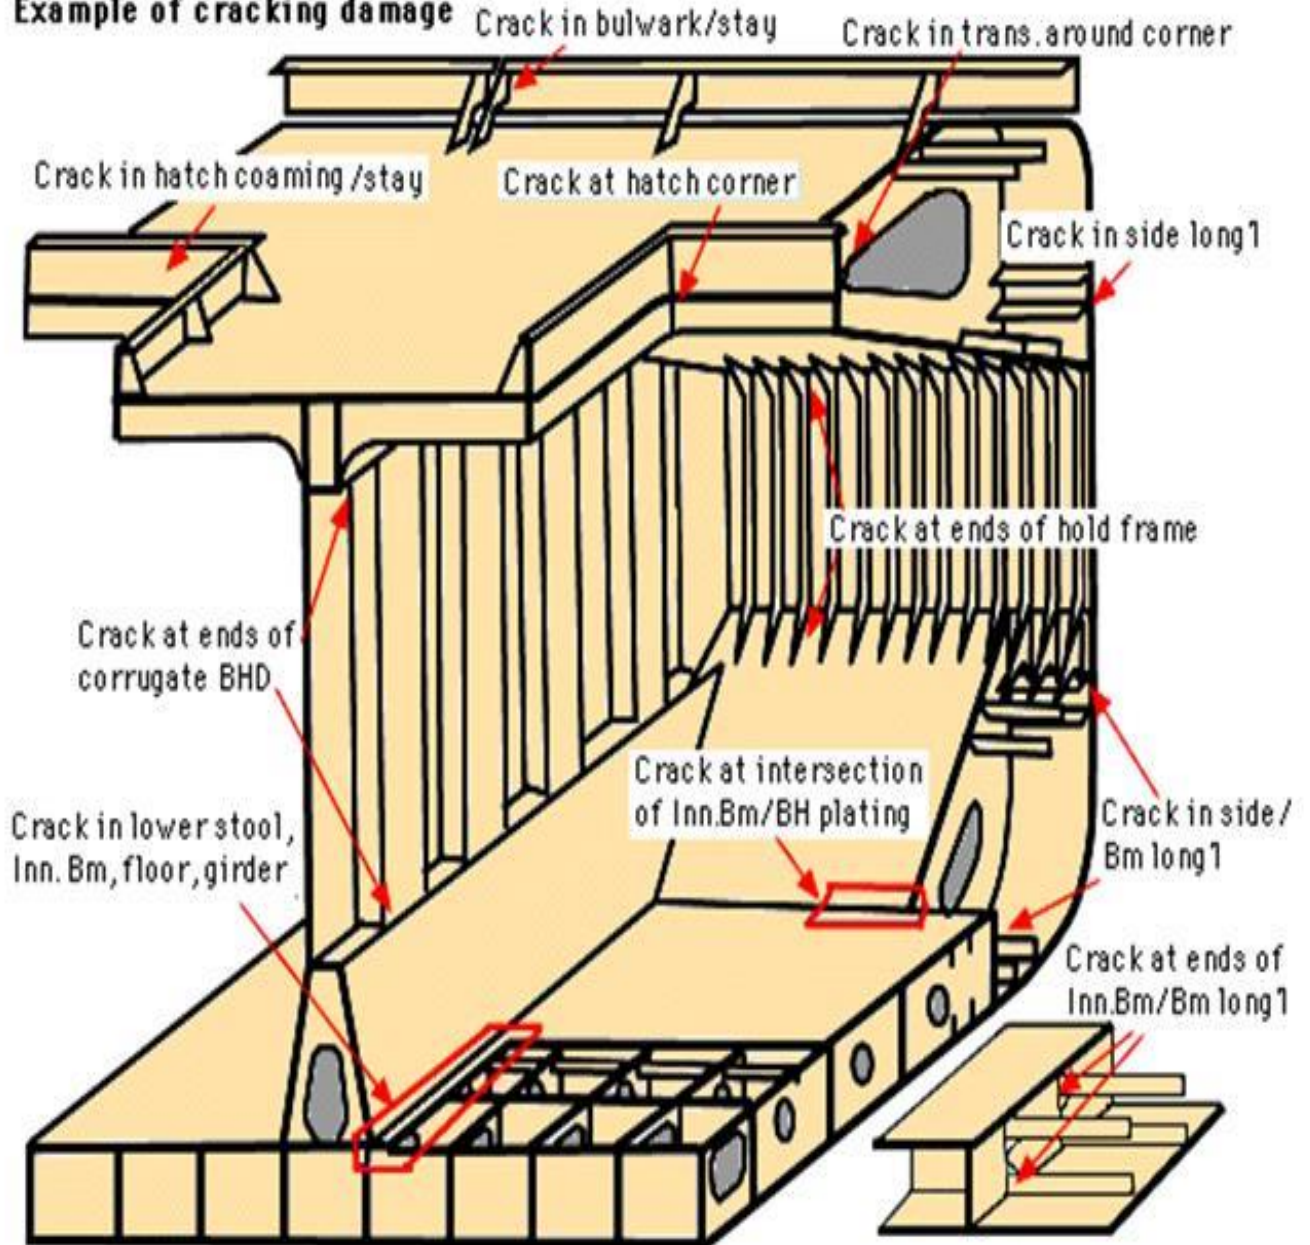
EXAMPLES OF CRACKING DAMGE ON CARGO HOLD AND BOTTOM ON SINGLE SKIN BULK CARRIER
